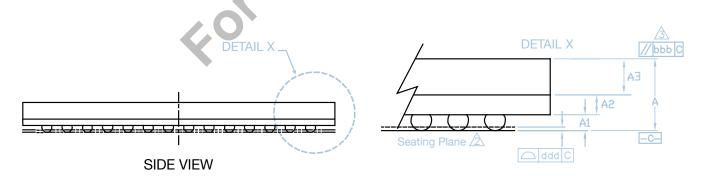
Side View with Seating Plane for the B5Nq Package.
